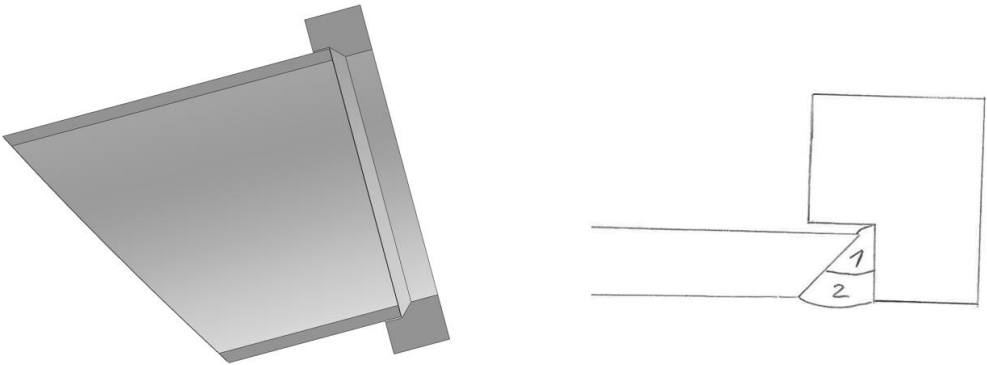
Preparation of weld bevel and corresponding schematics of weld passes layout for joining flanges of DUX/DLX, DUH/DLH and DUC/DLC ports
